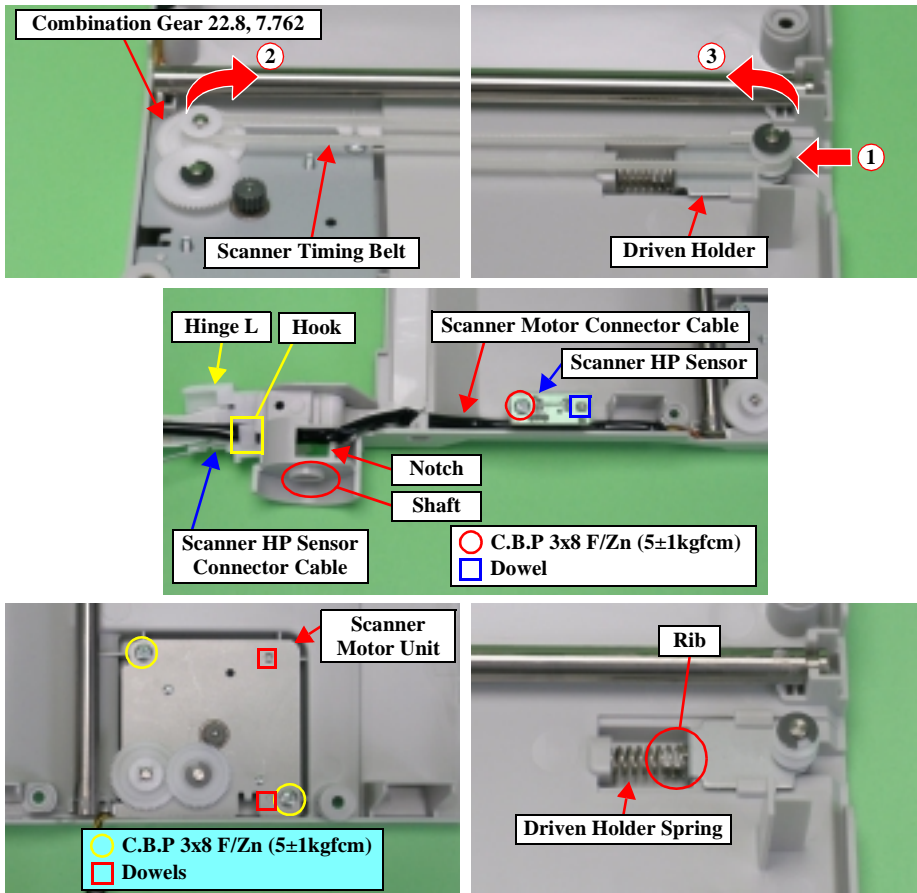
Scanner Motor Unit/Scanner HP Sensor/Driven Holder Removal
